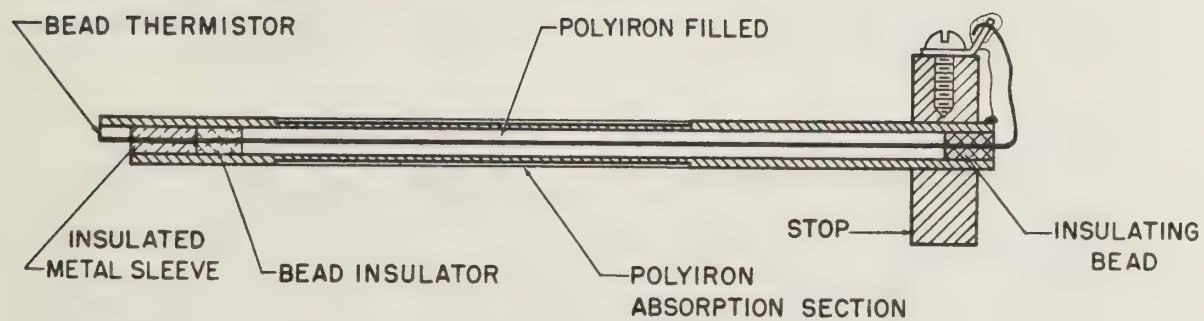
CUTAWAY VIEW OF POWER MONITOR PROBE
